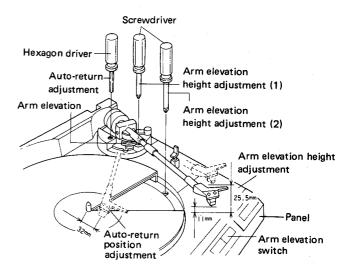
1 Arm elevation height adjustment and auto-return adjustment
